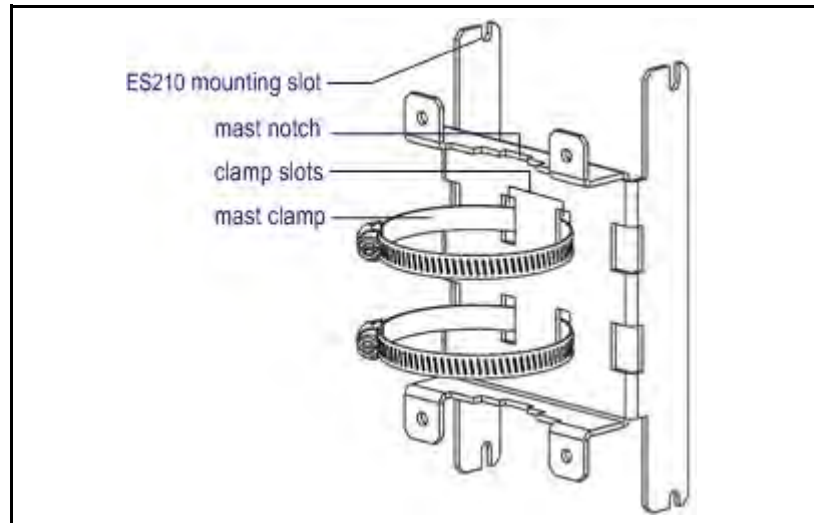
Attaching Mast Clamps to the Mounting Bracket
